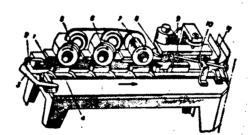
Semiautomatic machine tool for complex machining of rectangular workpieces: 1) Workpiece; 2) loading aperture; 3) loading lever; 4) screw conveyor to transport workpiece along bench; 5 and 6) abrasive (grinding) wheels for facing; 7) abrasive wheel for cutting grooves; 8) miller for punching films and milling holes; 9 and 10) brushes for cleaning dust from finished product; 11) trough for moving finished products to packing bench.
